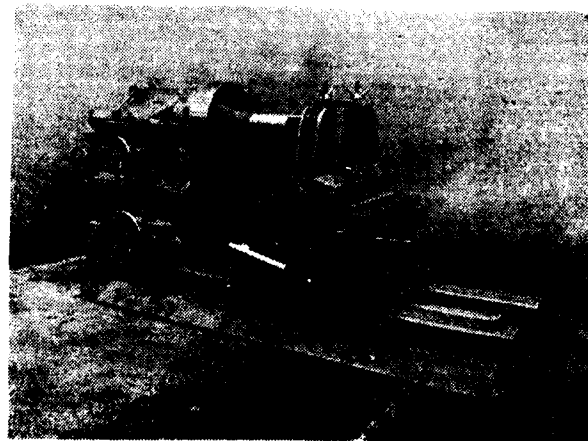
RICHARDS No. 2 size "AB" type, Patent Axle Box Boring, Facing & Radiusing Machine.
